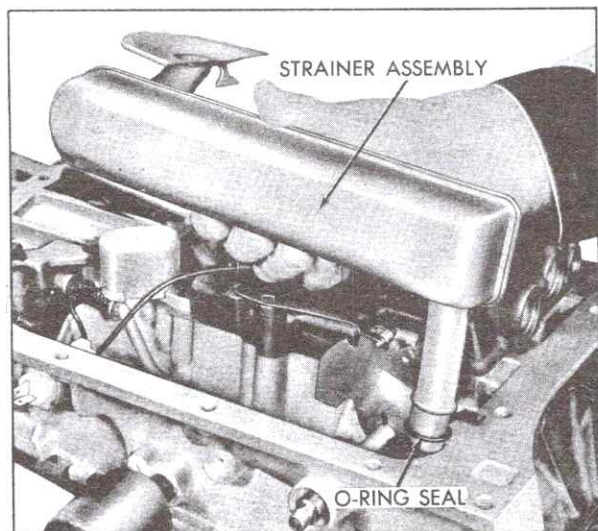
Removing Intake Pipe and Strainer Assembly
